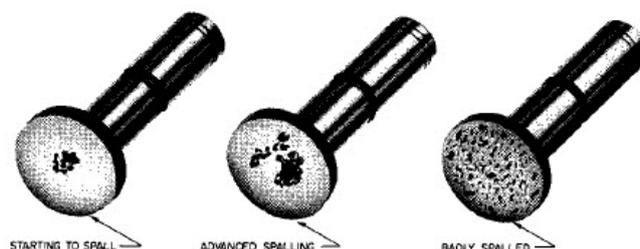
Appearance of Spalling Marks on Face of Hydraulic Tappet Bodies
